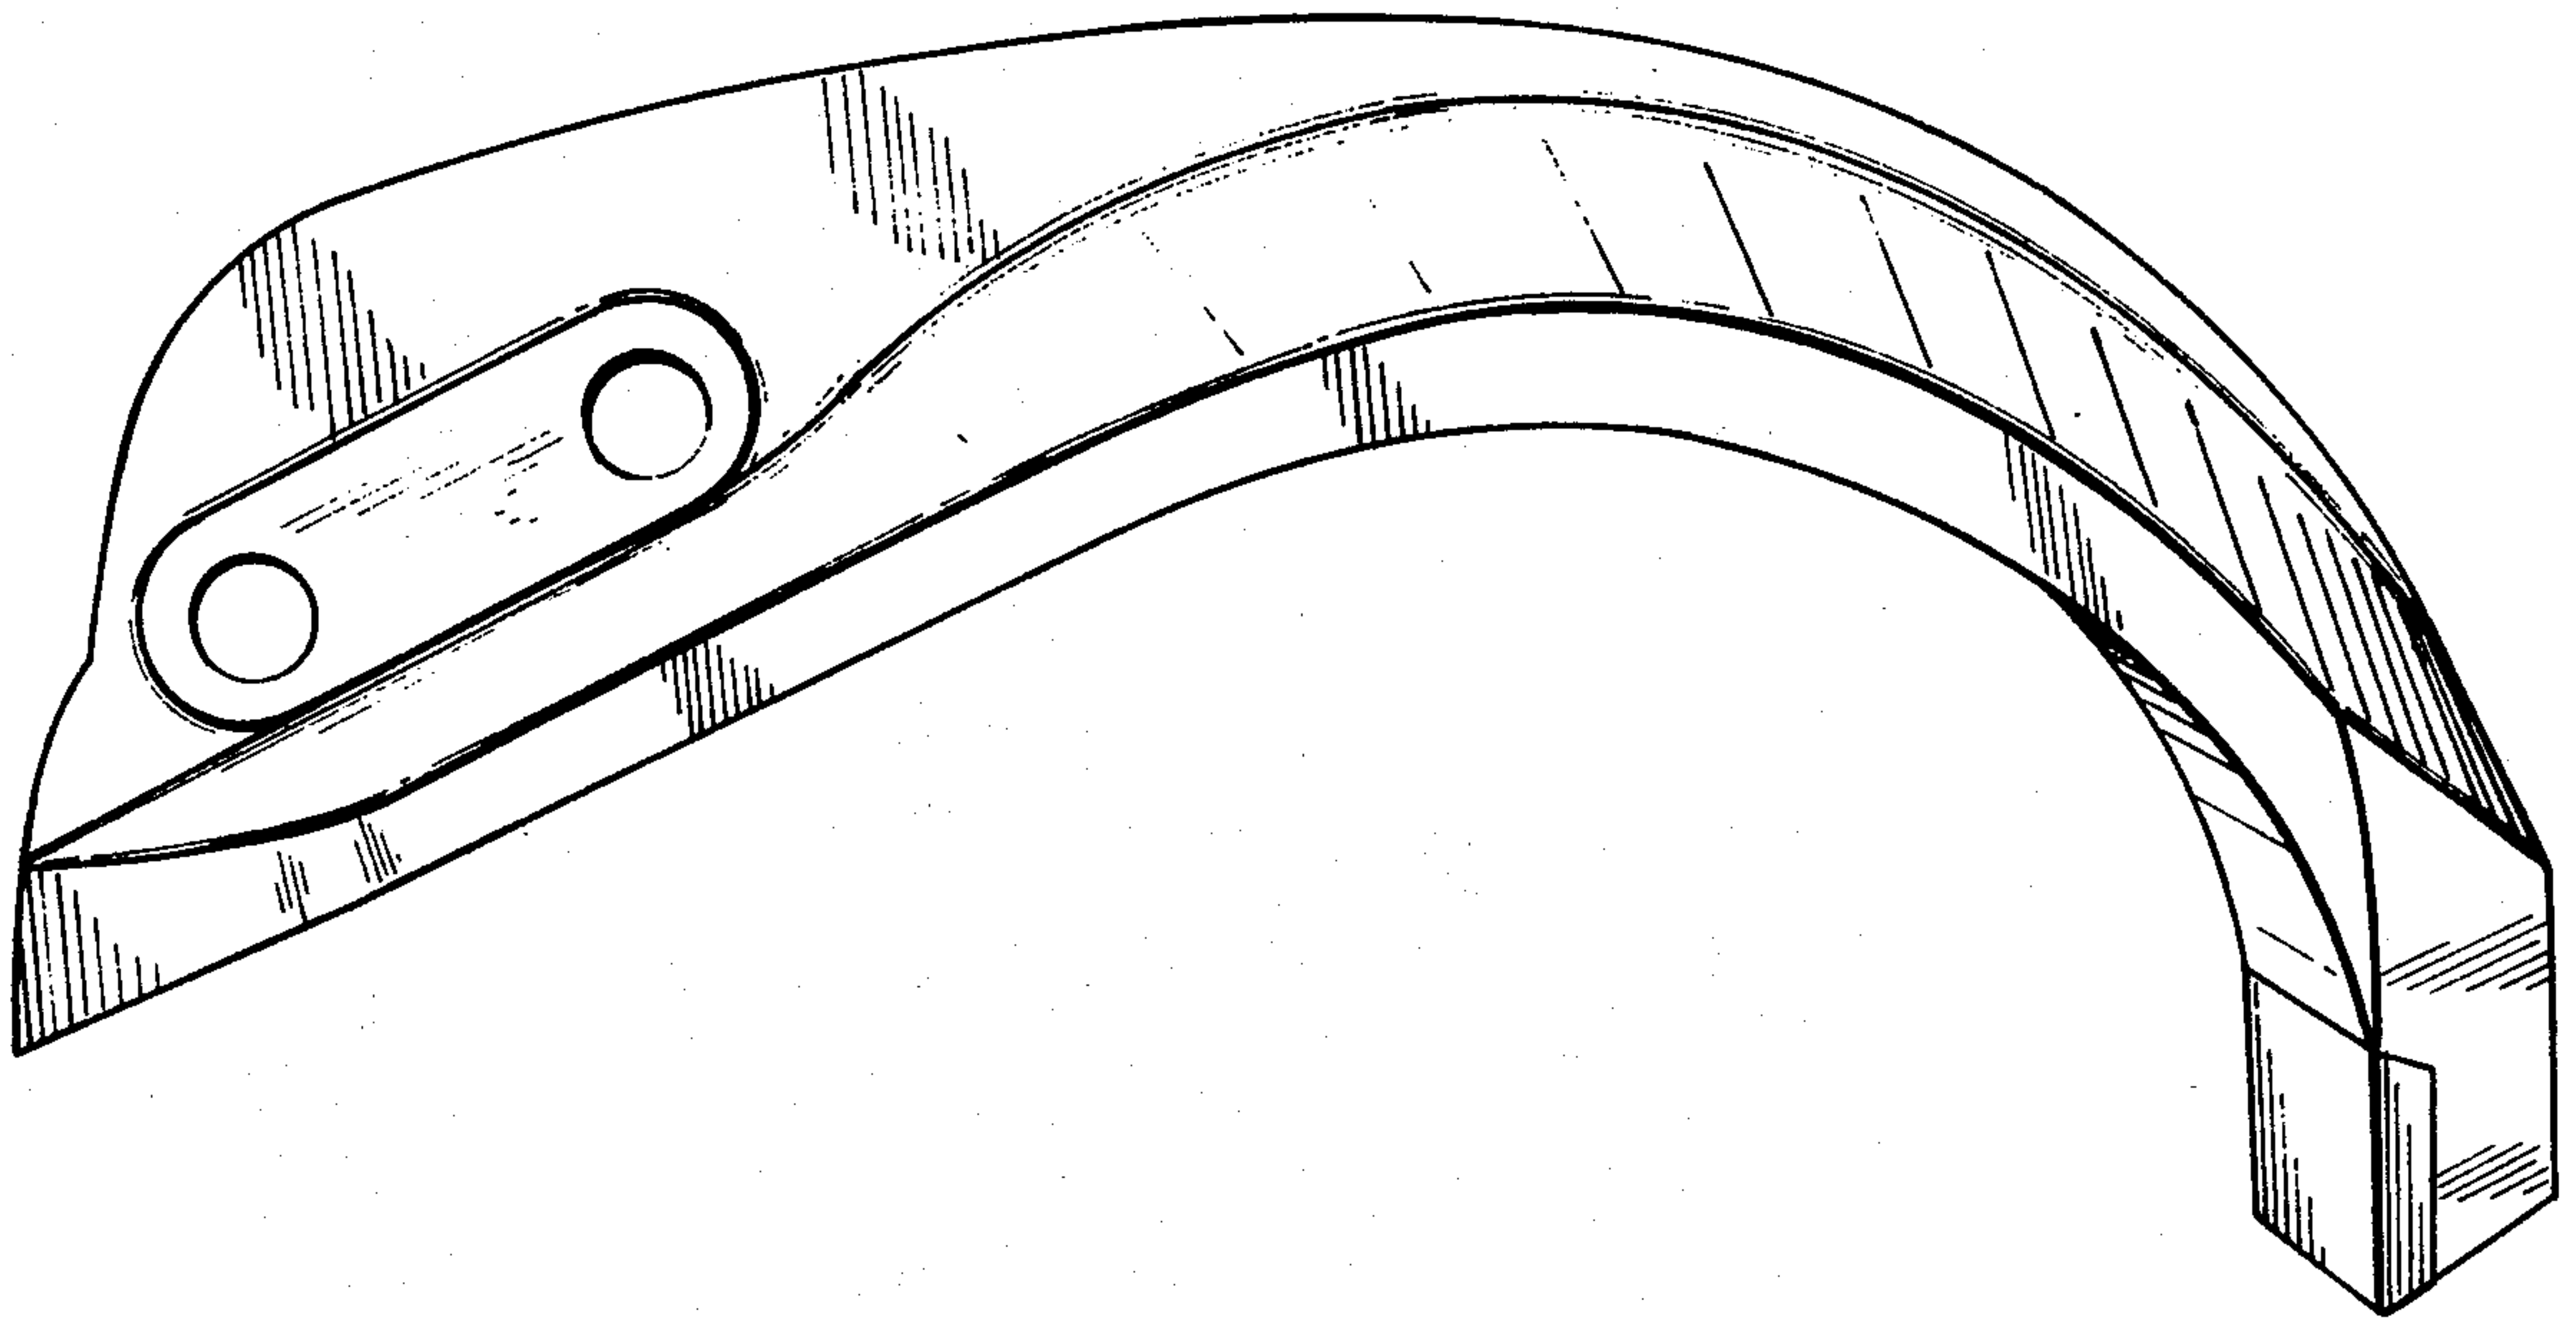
is a side elevational view of a bark cutter for a debarking machine;
